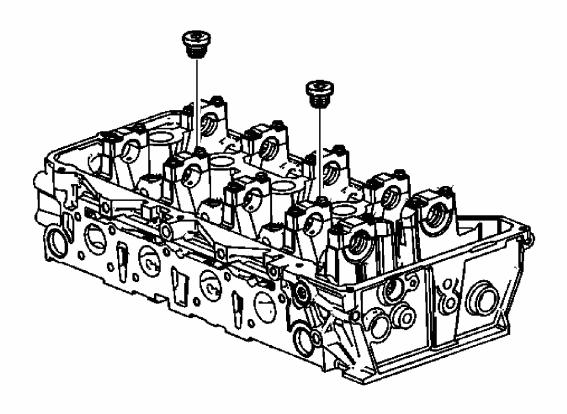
View of Threaded Coolant Plugs Courtesy of GENERAL MOTORS CORP.
